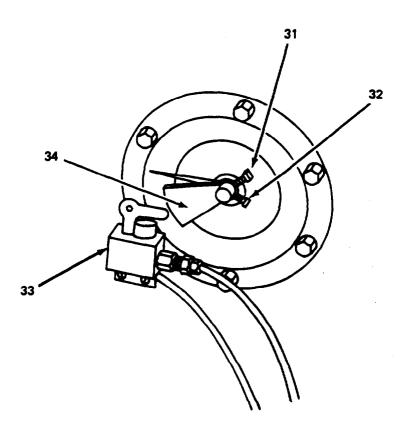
Disassemble/Assemble Asphalt Tank Gage (Sheet 1 of 2).
